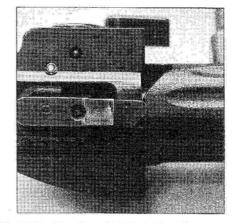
Cocking Piece/Bolt Body Dent Engagement
